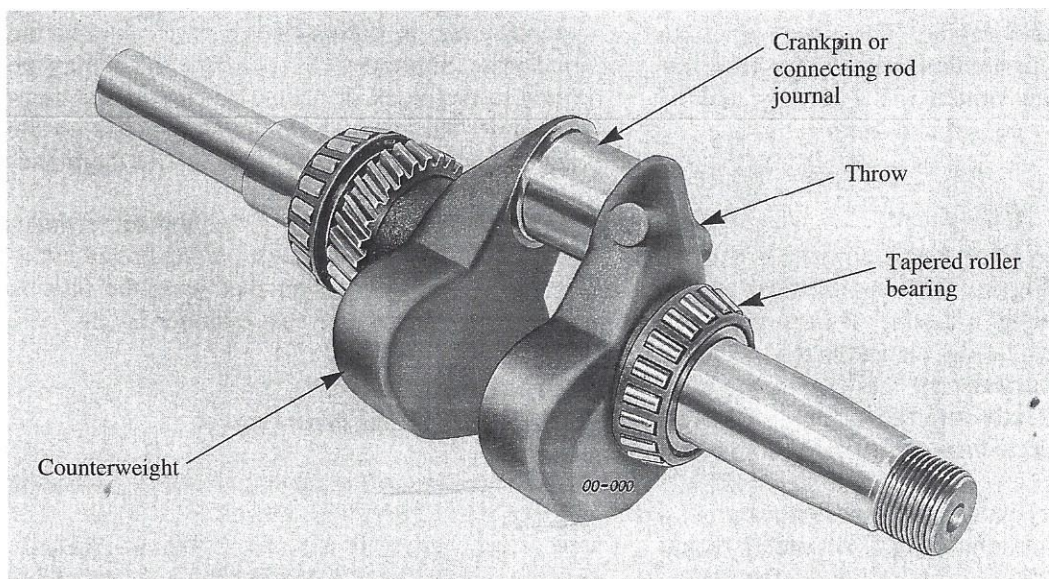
Crankshaft for a single cylinder engine. Large counterweights opposite the crank journal balance rotational forces.
